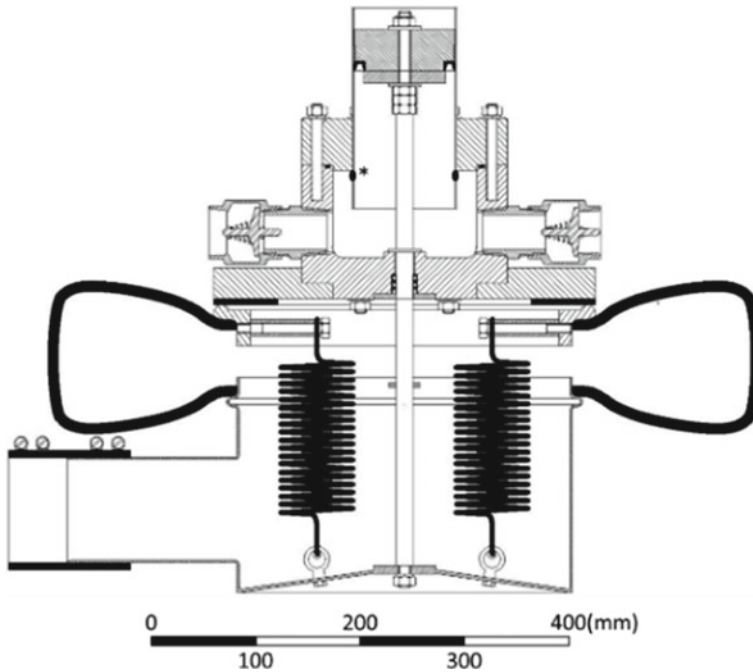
Bunyip PA-13 scaled cross-section drawing
